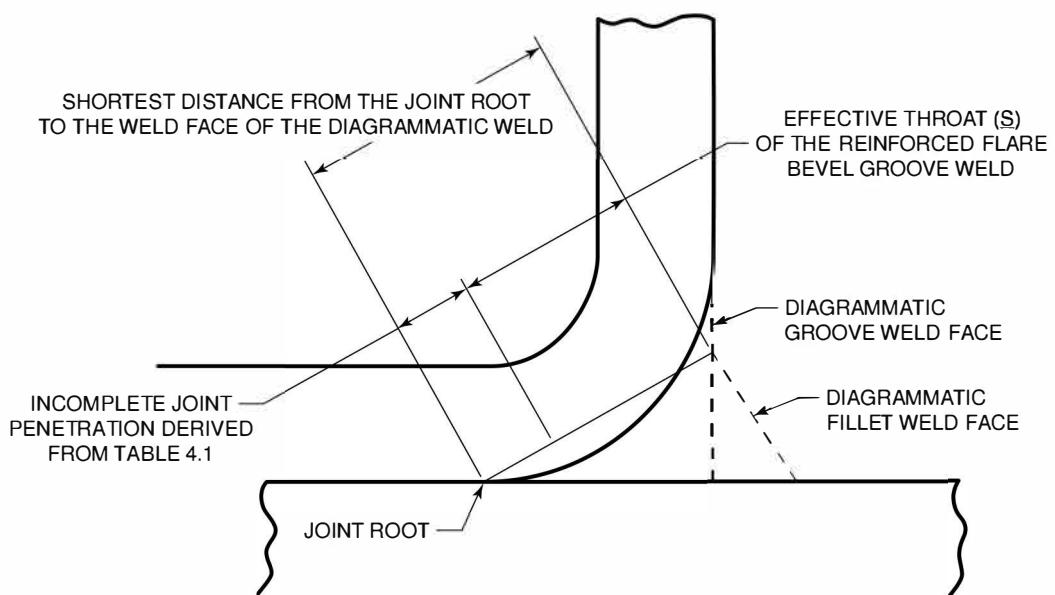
Flare Bevel Groove Weld with Reinforcing Fillet Weld (see 4.4.2.7)
